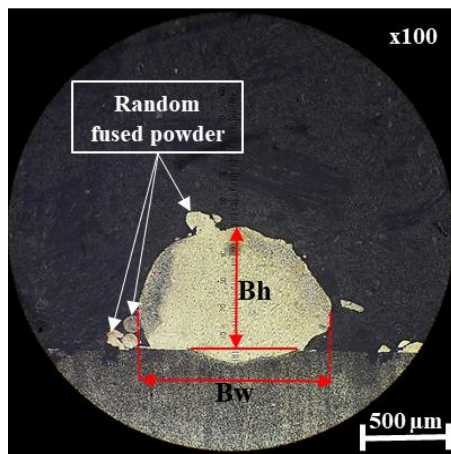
Cross-Sectioned Single-Bead showing the Bh (mm) and Bw (mm)
